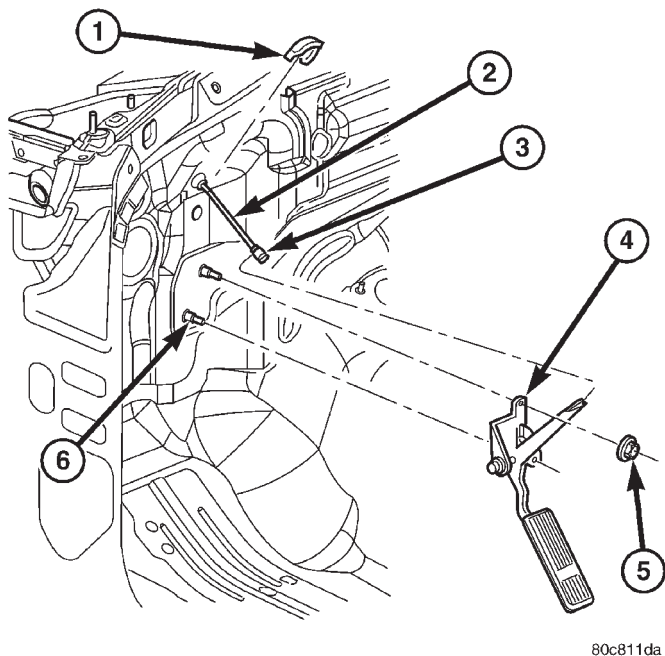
ACCELERATOR PEDAL/BRACKET ASSEMBLY
